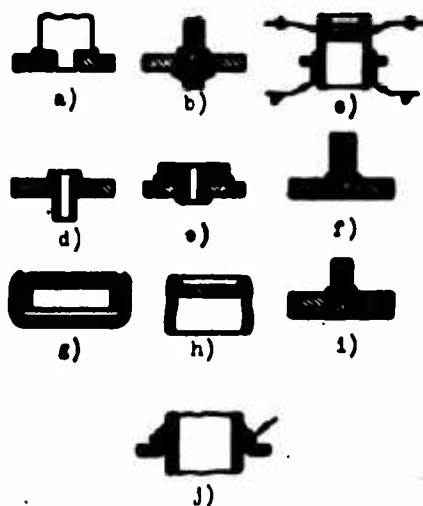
Examples of assembly of components in soldering without auxiliary attachments, with use of: a) gravity; b) skirting; c) spot welding; d) expansion; e) upsetting; f) light pressing; g) calking; h) corrugations; i) gravity (ventilated seam); j) pin.
